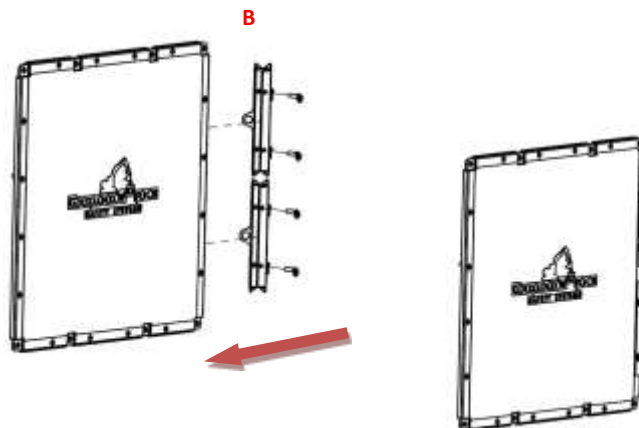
Pit Kit Step Two – Corner Connectors on One Side of Second Panel
